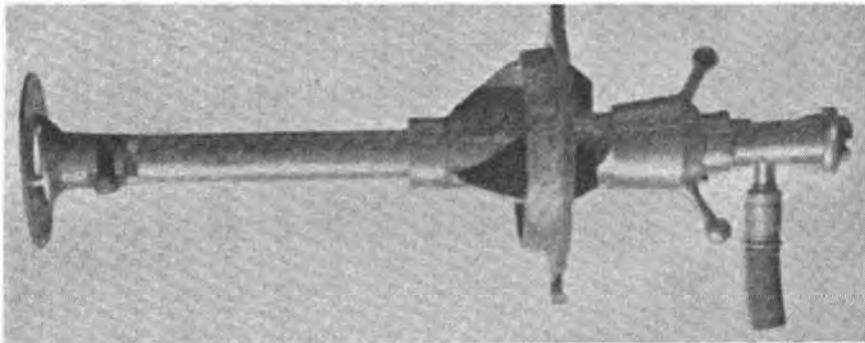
SPRAYER ASSEMBLY IN WORKING POSITION. NOTE SMALL GAP BETWEEN SPRAYER CAP AND TIP PLATE
